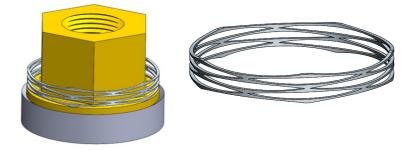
Spring placed on nut (lhs) Figure 36: Spring (rhs)
